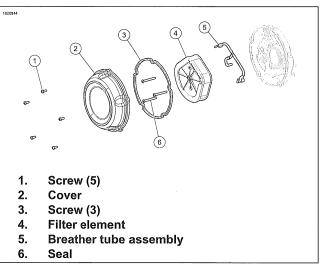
Replace Air Filter Element, Five-Screw Cover
